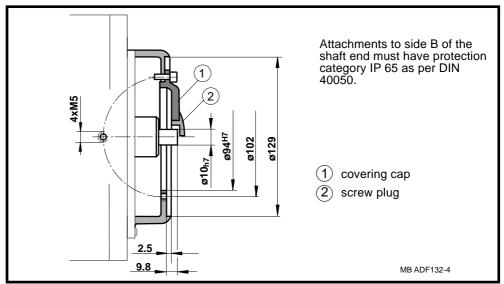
Main spindle motor ADF 132 - shaft extension (with high-resolution motor feedback, type 3 only)
